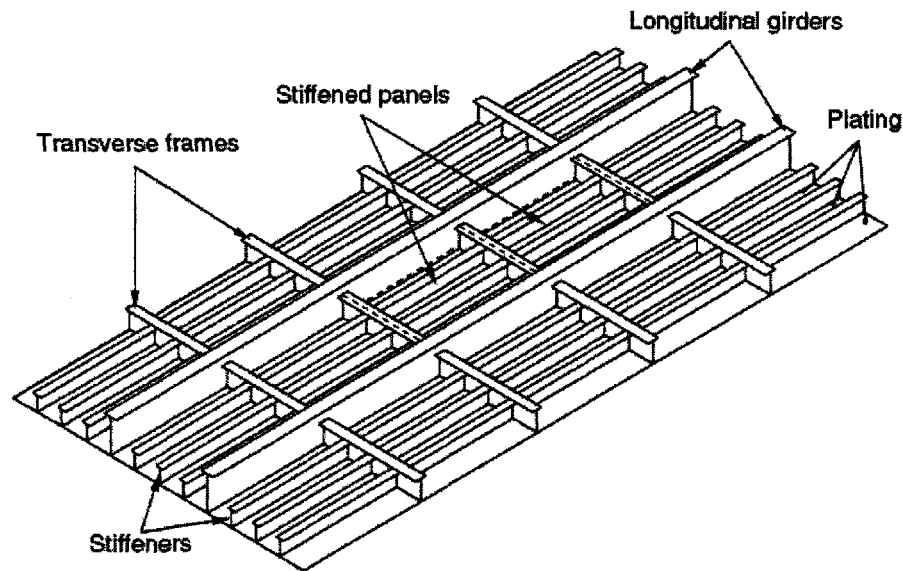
A typical stiffened panel for naval applications with longitudinal, transverse and orthogonal stiffeners
